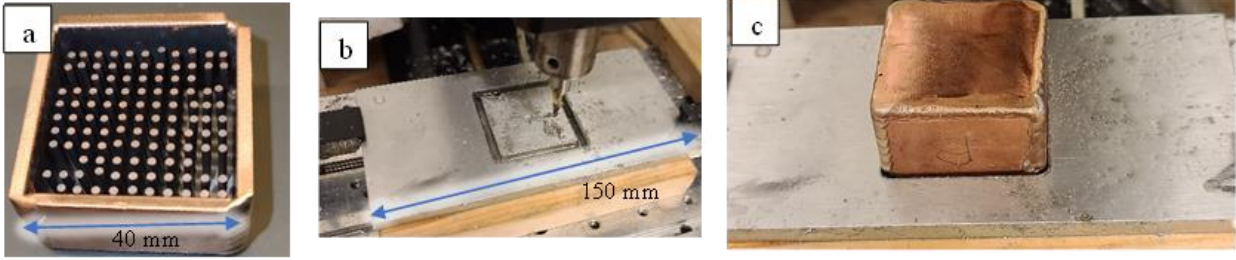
Construction of single flash chamber. (a) Walls attached to a commercial heat sink (b) Machining in top plate for grooves and holes (c) Assembly of copper heat sink with top plate via O-ring.
